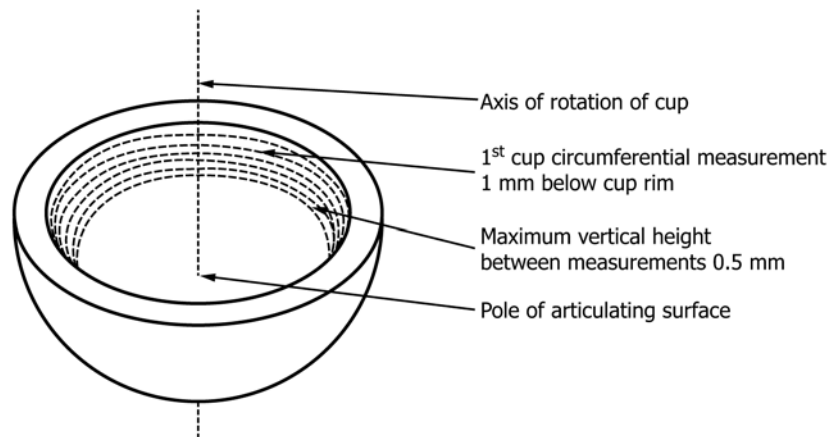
Schematic Diagram Showing Location of Cup Circumferential Measurements
